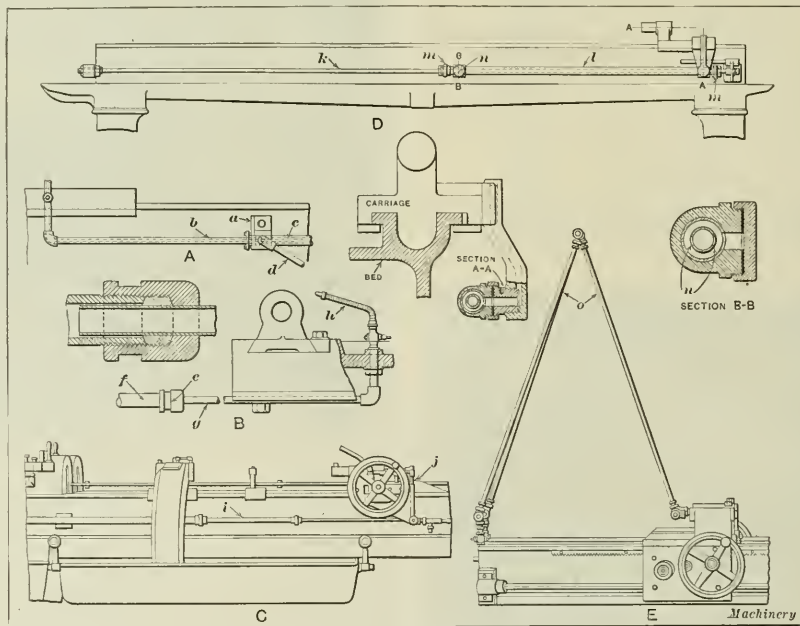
Methods of delivering Lubricant to Tools where Compensation is required for Movement of Machine Members
